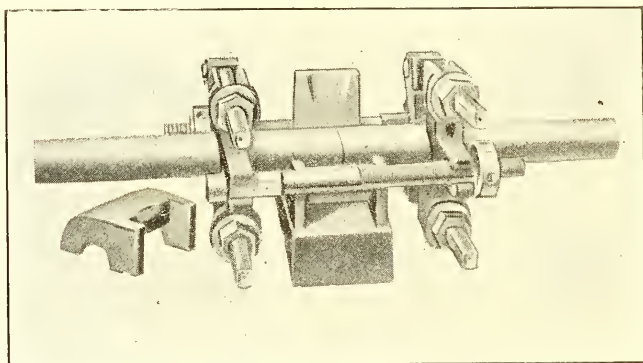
Pipe Held in Clamps, Mold Partly Assembled.
